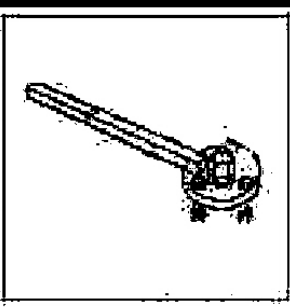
Installing Intake And Exhaust Camshaft Oil Seals
